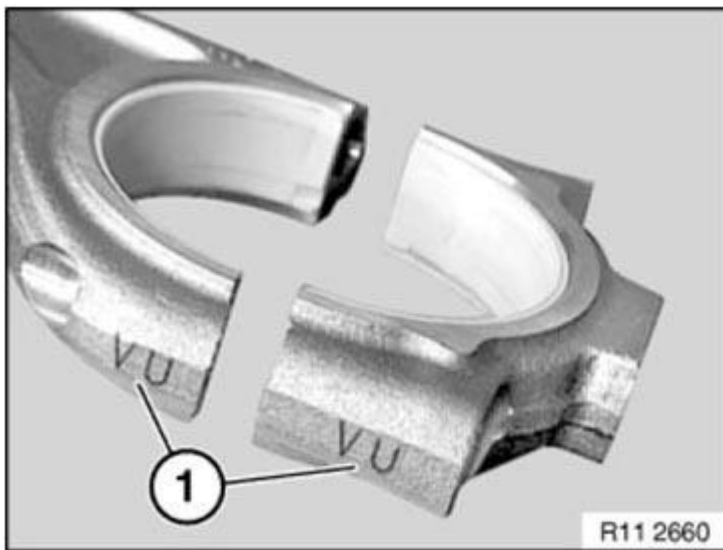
Identifying Conrods And Conrod Bearing Caps Pairing Letters
